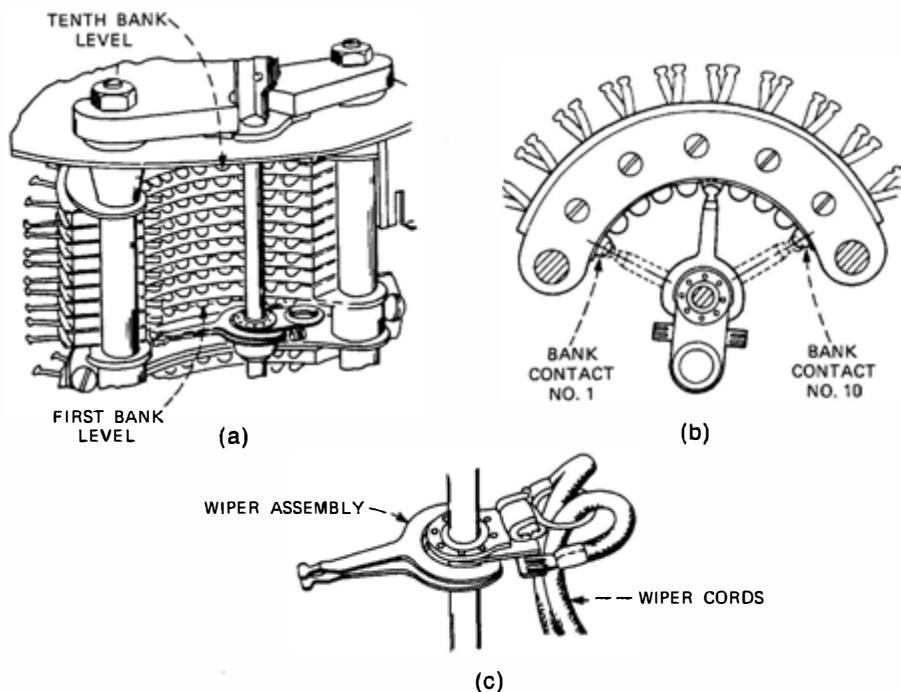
Details of the step-by-step switch: (a) bank assembly; (b) top view of switch bank; (c) wiper assembly.
